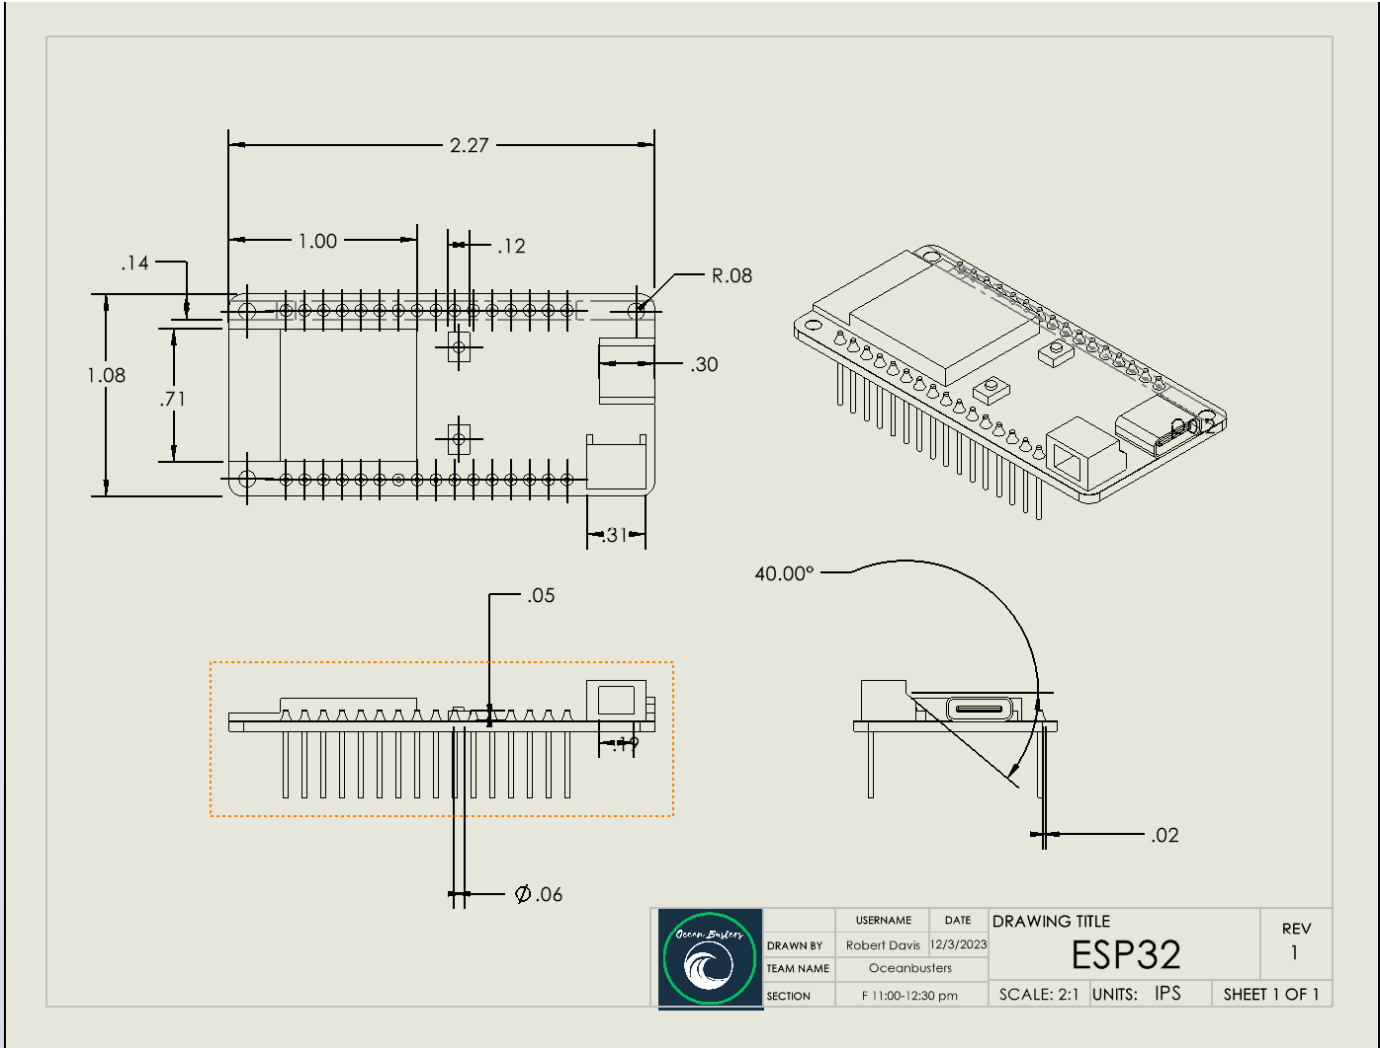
Working drawing of ESP32 board (bill of materials omitted, copyrighted) [47].
